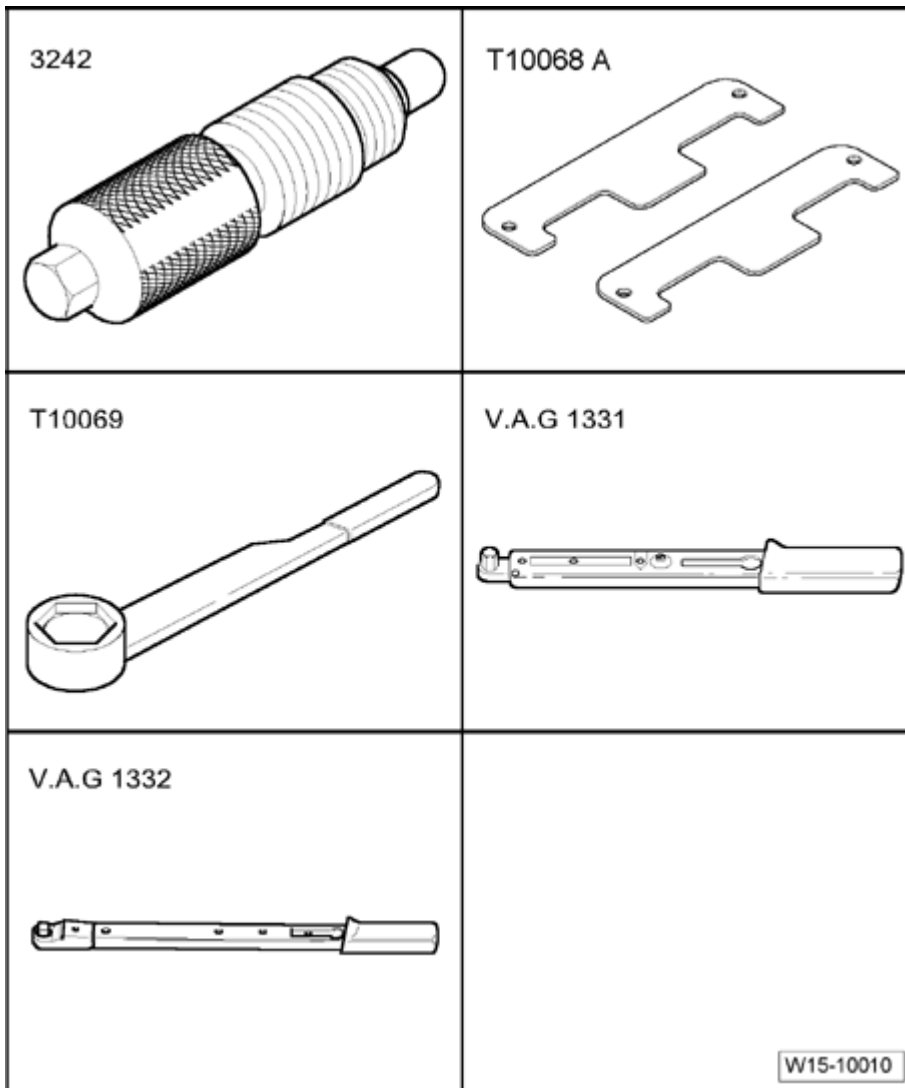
Identifying Special Tools - Valve Timing, Engine Code BAP, Adjusting
